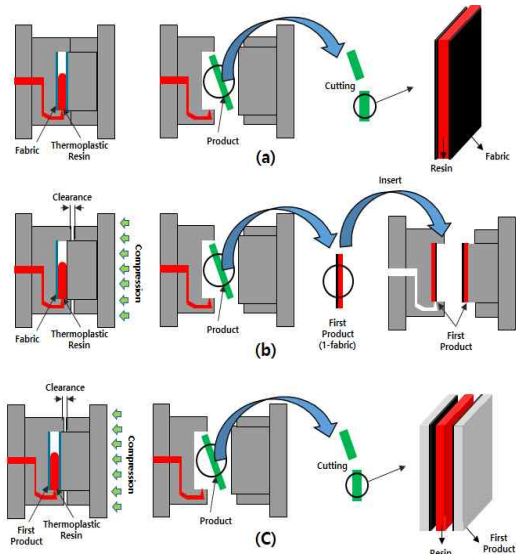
Schematic of injection molding process : (a) Injection molding(IM), (b) Injection compression molding(ICM), (c) : Insert-over molding(IOM)
